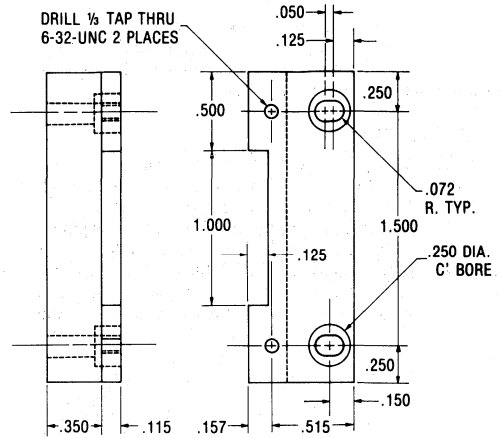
Adapter for Hermetic Package to Standard Hybrid Amplifier Test Fixtures
